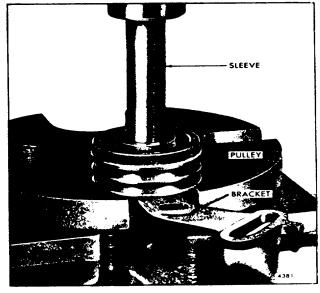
Removing Shaft and Bearing Assembly and Bracket from Idler Pulley
